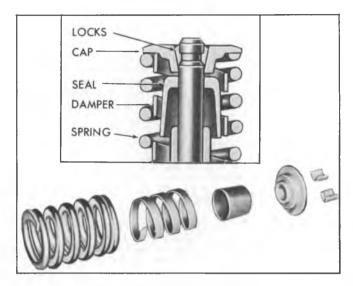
Exhaust Valve Spring Installation ("Mark IV V8")
